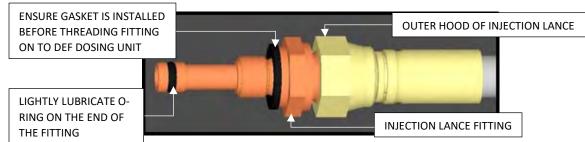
Injection Lance Fitting with O-Ring and Gasket
